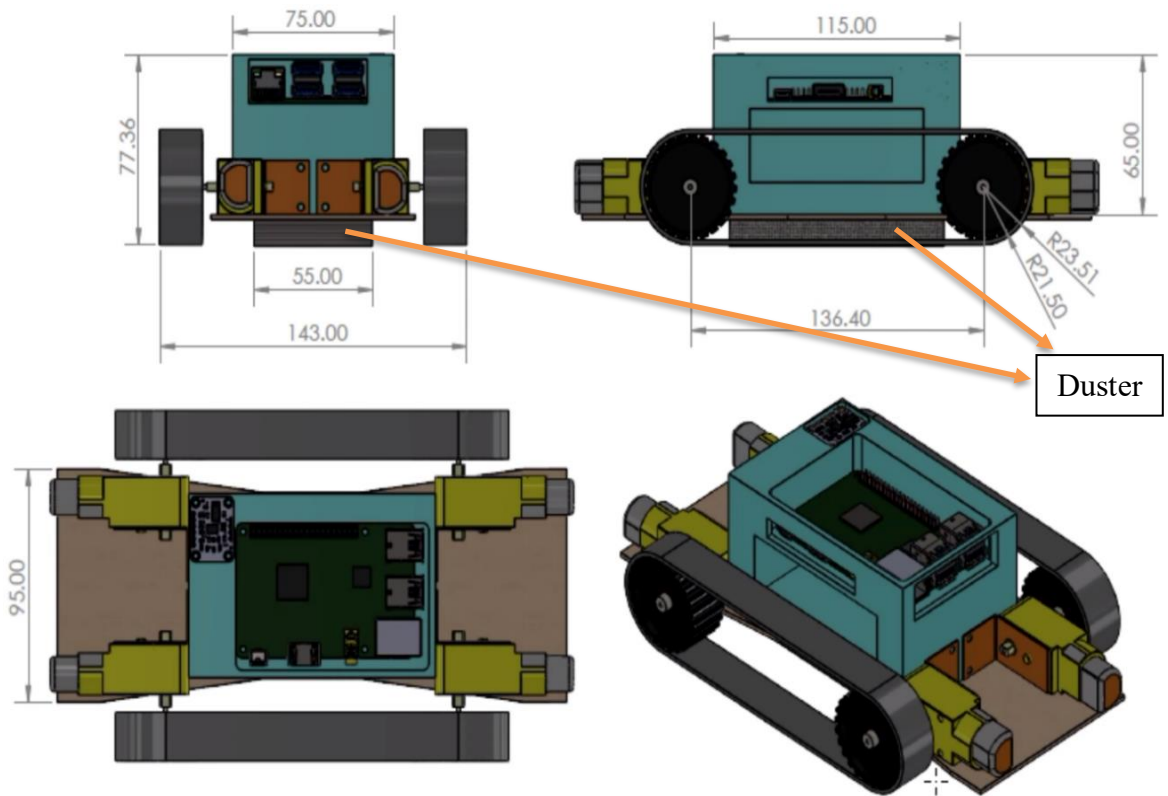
Starting from top left to right and bottom, side view, front view, top view, and isometric view of autonomous board cleaner.
